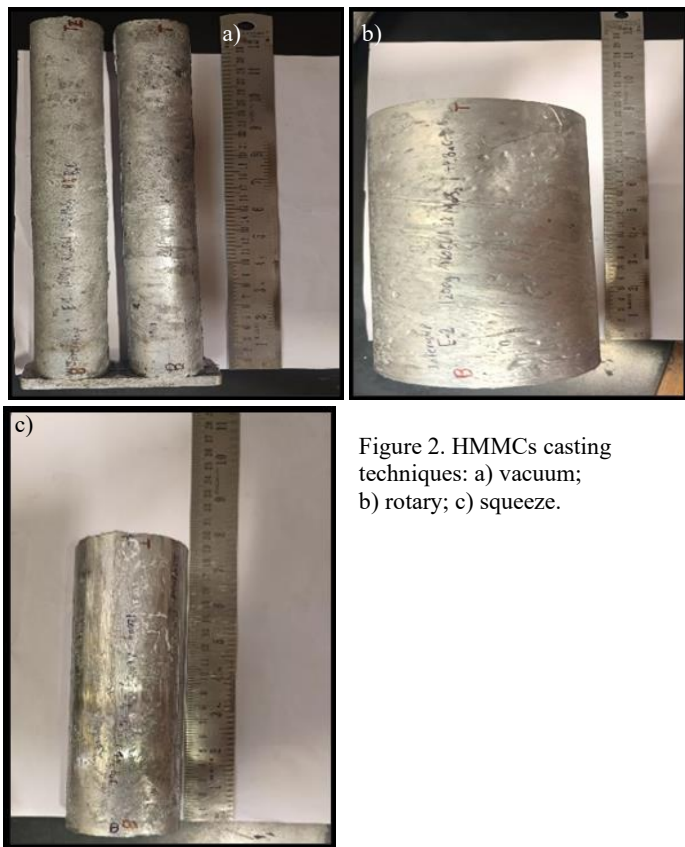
HMMCs casting techniques: a) vacuum; b) rotary; c) squeeze.
